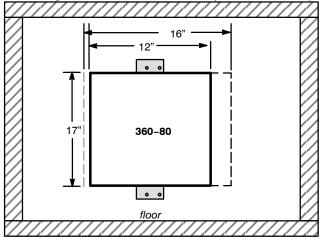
Front View Clearance of the 360-80 ICB Shelf
